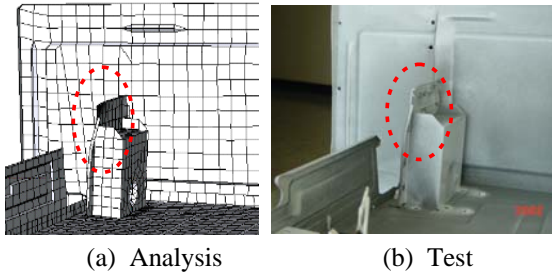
Deformed shape of magnetron base plate after bottom-side drop
